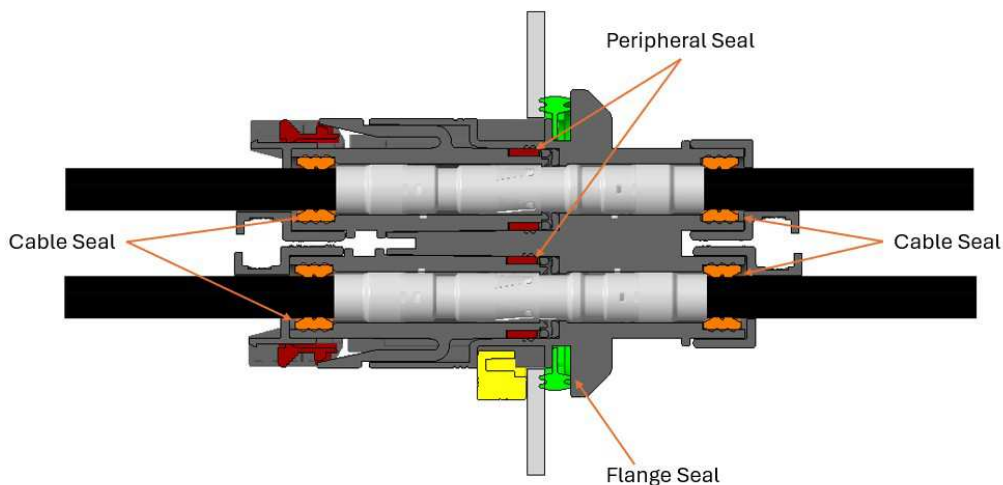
b: DT Highspeed 2 port Bulkhead Pin Assembly mated to Socket Assembly
